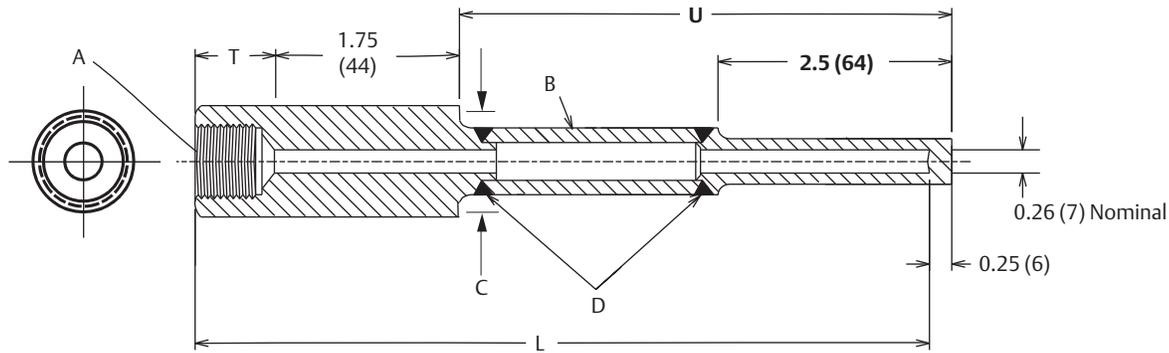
Weld Mounted Thermowells-Stepped⁽¹⁾
